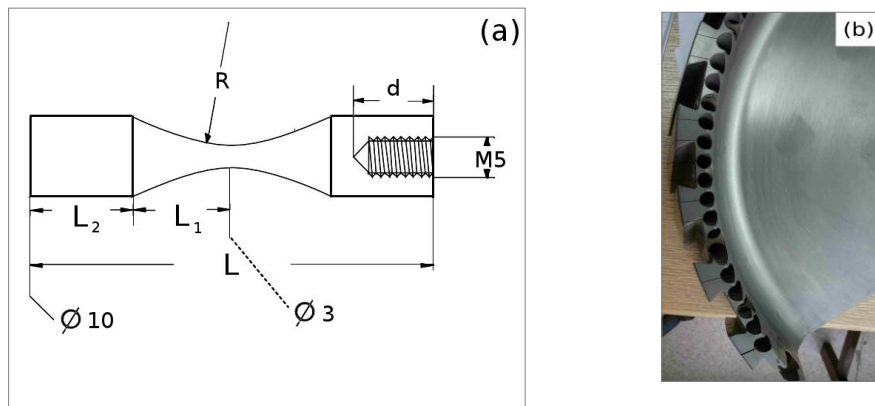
(a) Drawing of the fatigue specimen and (b) location of machining in the disk.
